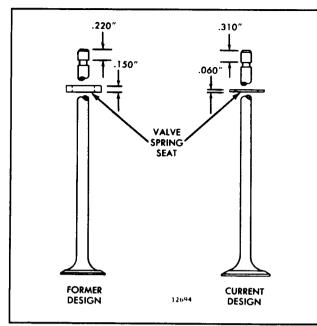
Former and Current Design Exhaust Valves (Four-Valve Head)
